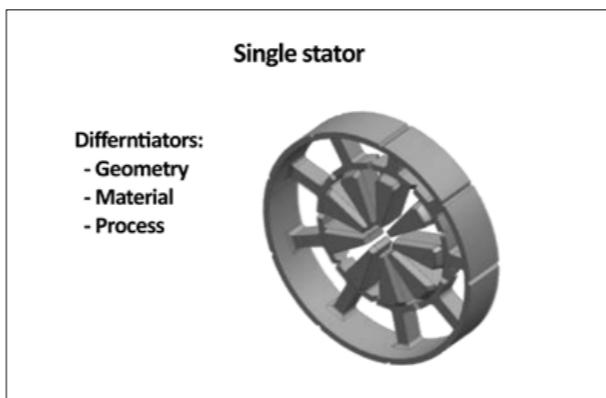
Complex geometry of the SMC stator produced by GKN Sinter Metals to high dimensional accuracy for use in the Elektra TFM [1] (Courtesy GKN Sinter Metals)
